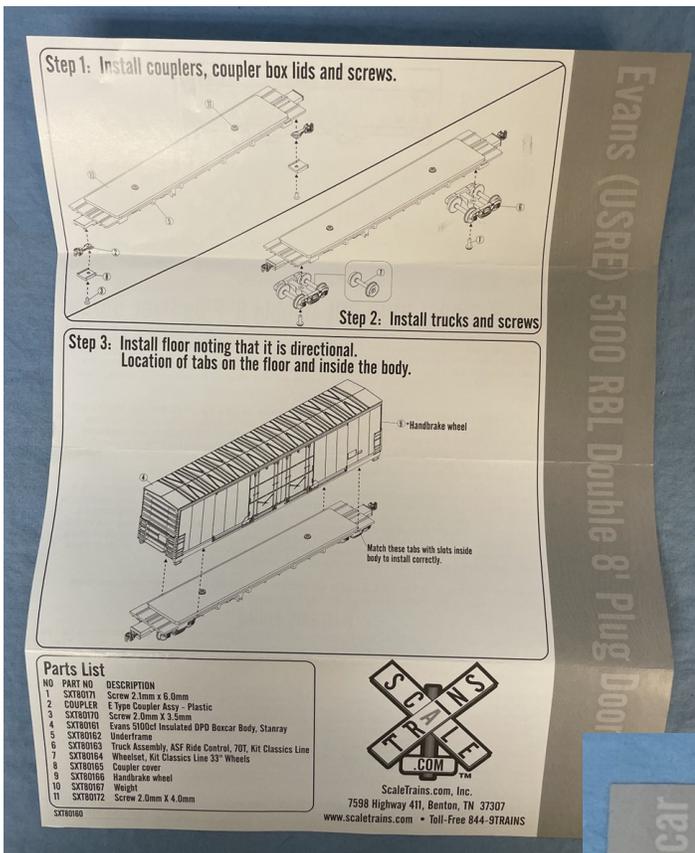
The single page instruction sheet includes typical isometric drawings and a parts list.
